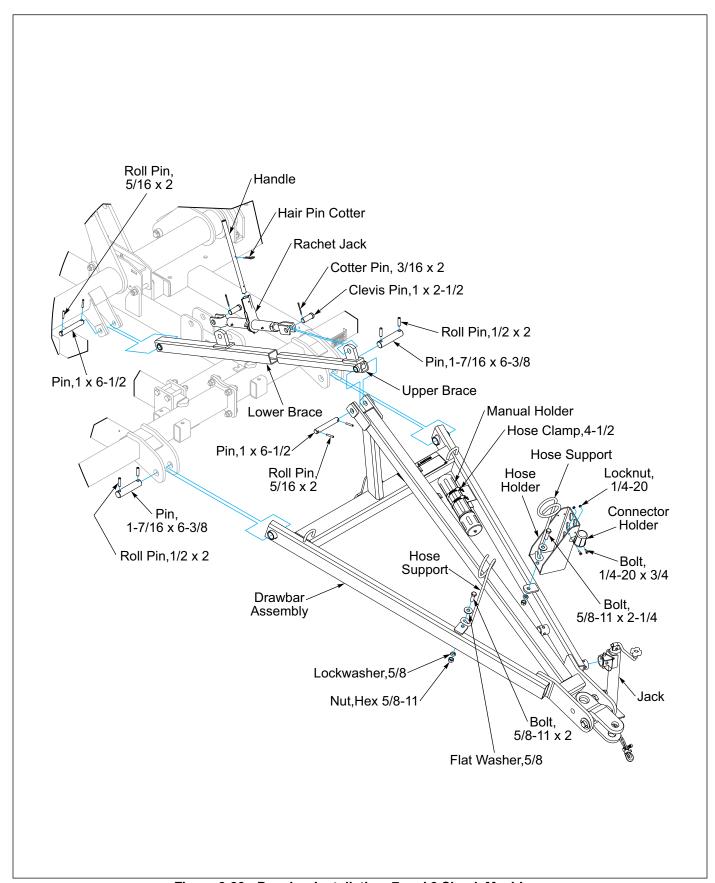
Drawbar Installation, 7 and 9 Shank Machines
